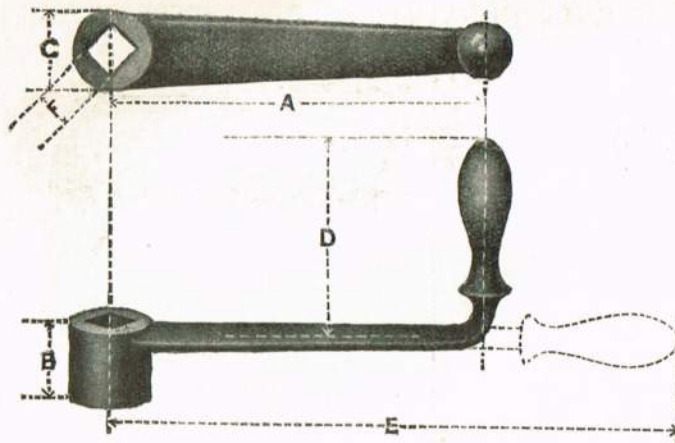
DROP-FORGED STEEL UNBREAKABLE MACHINE TOOL HANDLES.
